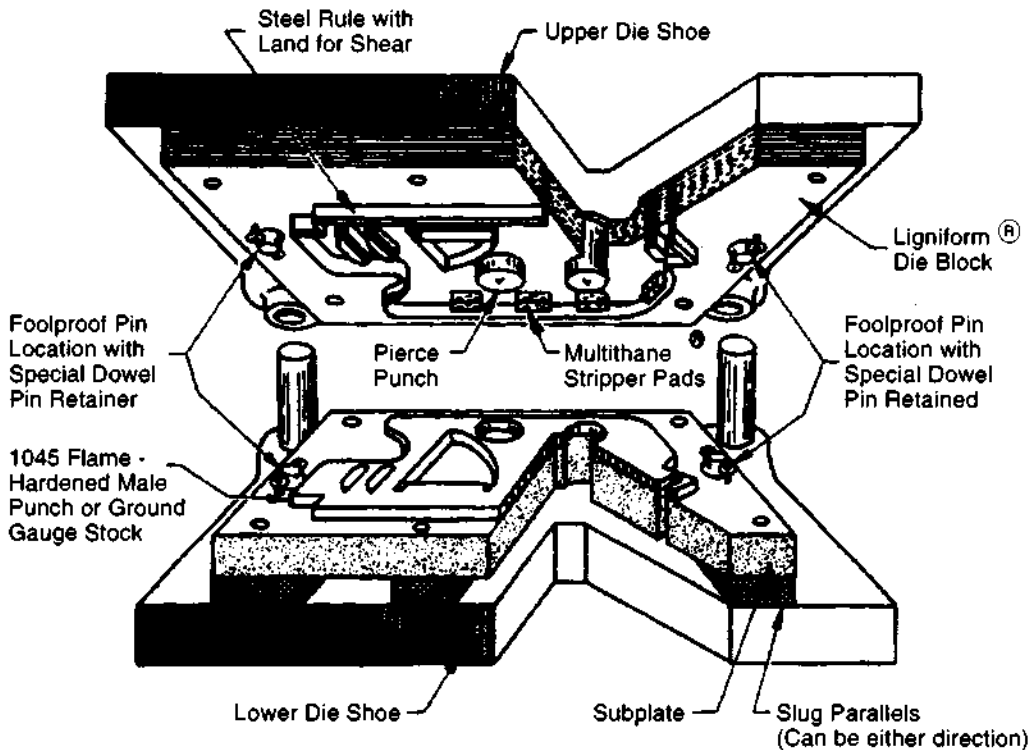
C4a Cross-section of a steel-rule blanking die. (Courtesy J.A. Richards Co.)
